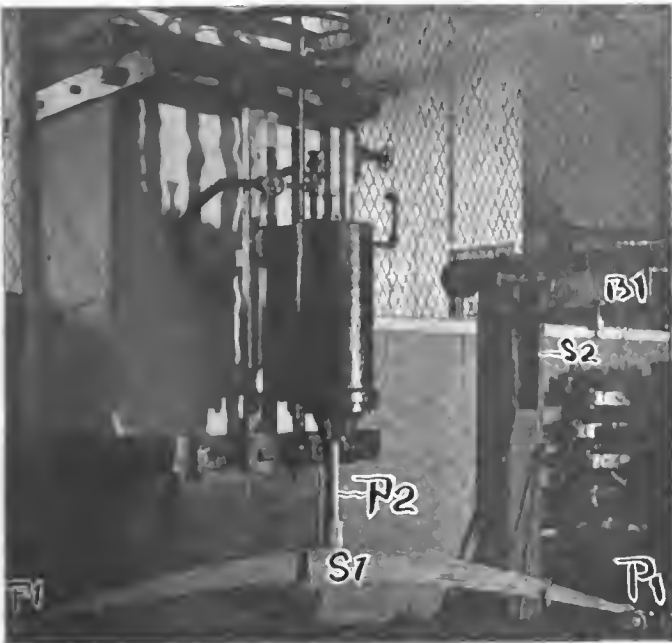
Spring-testing machine, showing the spring before pressure is applied, and platform scales for registering
